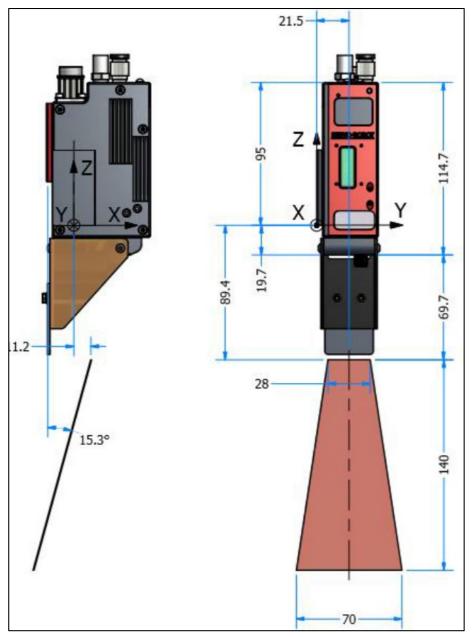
(a) Dimensions and view area (FUJI-CAM 2.0)
